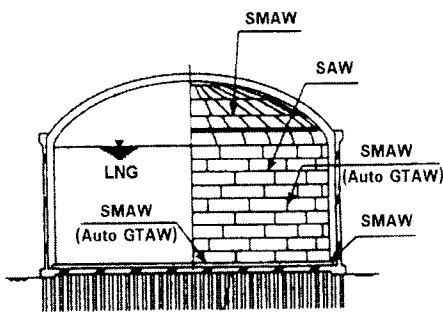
Schematic illustration of welding method used in construction of LNG storage tanks in Korea
